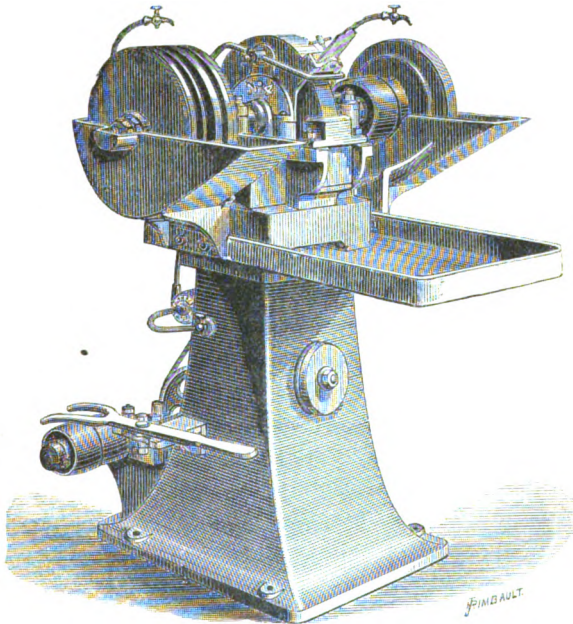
HANDYSIDE'S PATENT TOOL-GRINDER.
